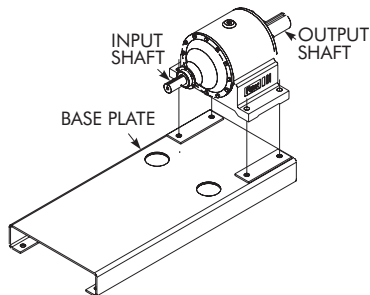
A — Aligning Reducer Mounting Holes to Baseplate
